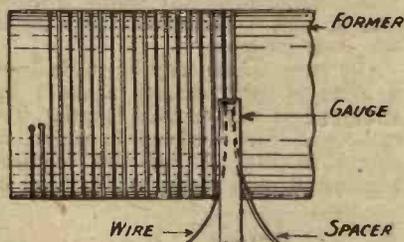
Both wire and spacer are fed through the small hole. For clearness the turns are shown well spaced, but actually they are wound close, the string being subsequently removed.
